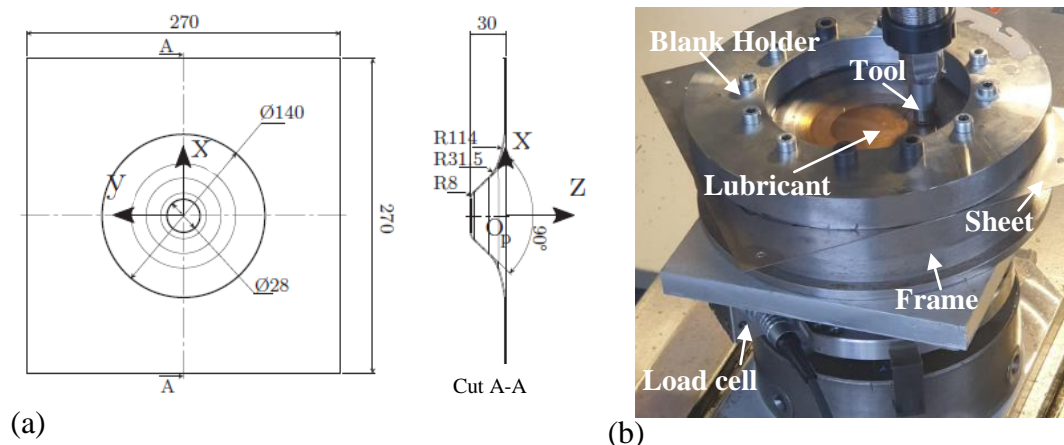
Experimental setup (a) shape of 45° wall angle truncated cone (dimensions in millimeters), (b) incremental forming device
